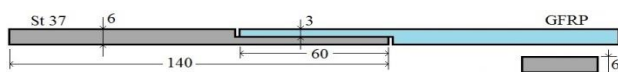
Schematic of simple single lap specimens geometry (dimensions in millimeters)
